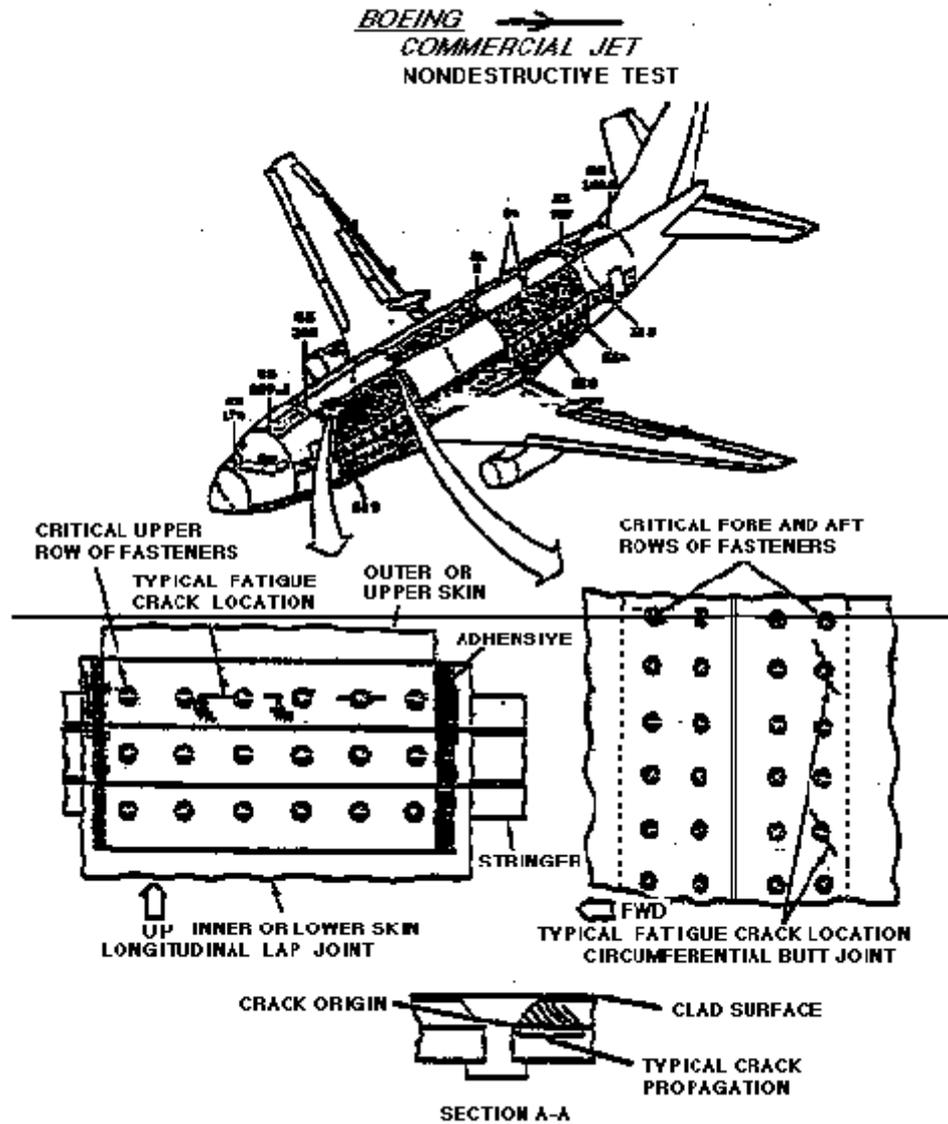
Typical fuselage skin joint configuration and crack orientation.
